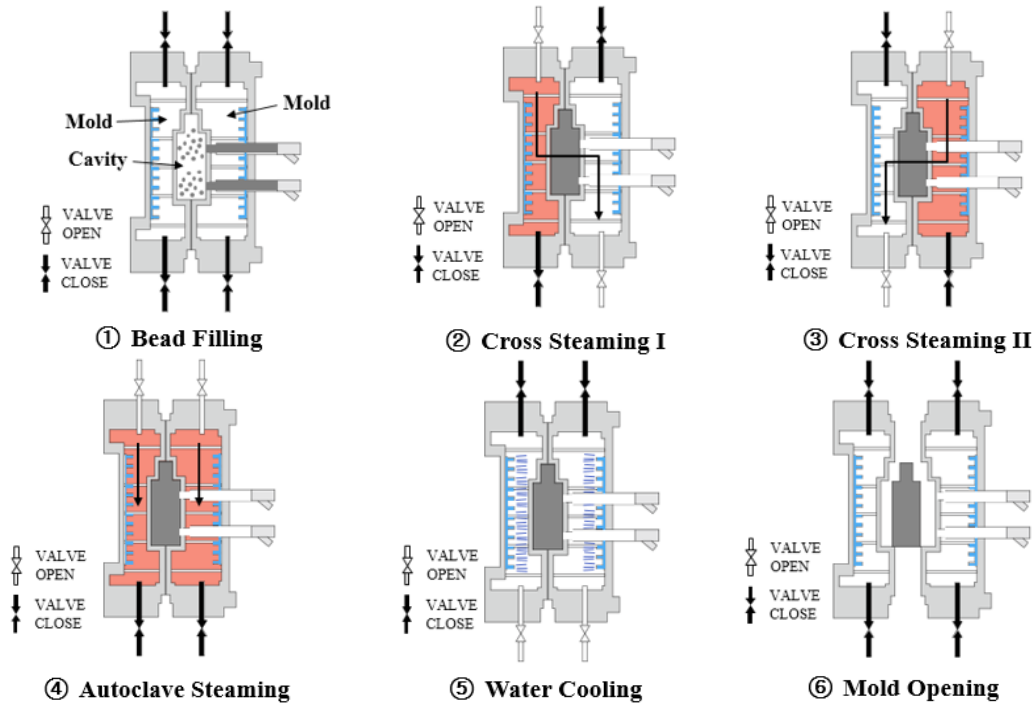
Schematic drawing of steam chest molding process using expanded polypropylene
